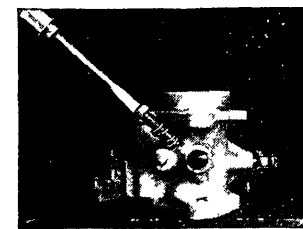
Install idle adjustment screw and spring. Back out from seated position to specifications given in Carter Specification table
